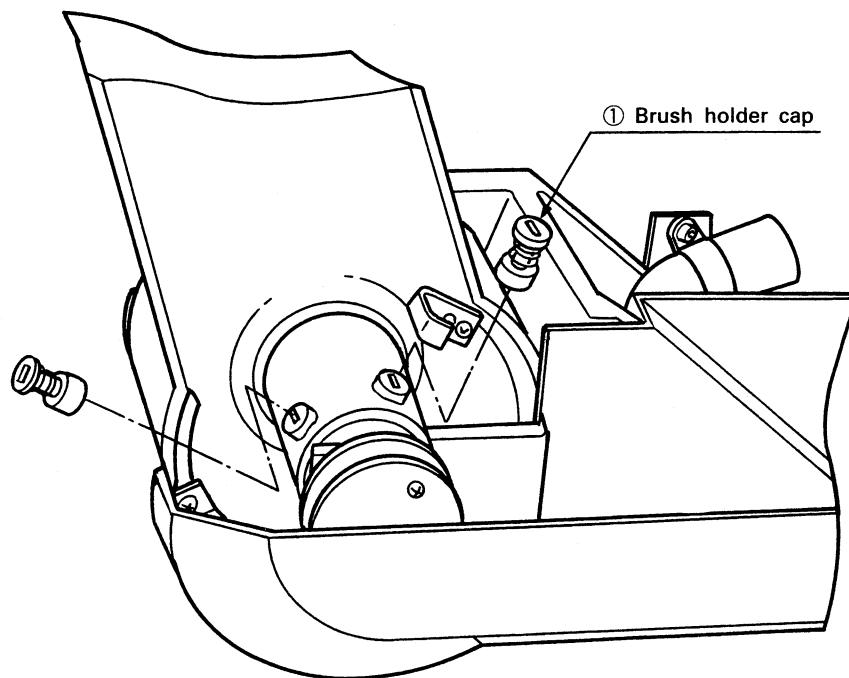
Checking and Changing the Shoulder Drive Motor Brushes
